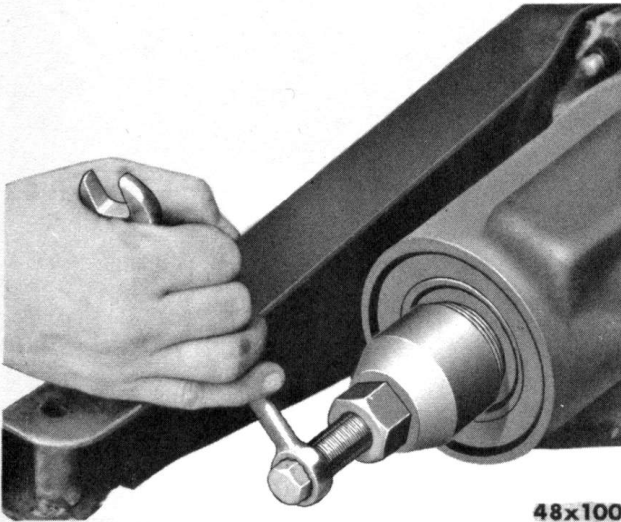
Removing Rear Axle Pinion Oil Seal (B-4-EU)
